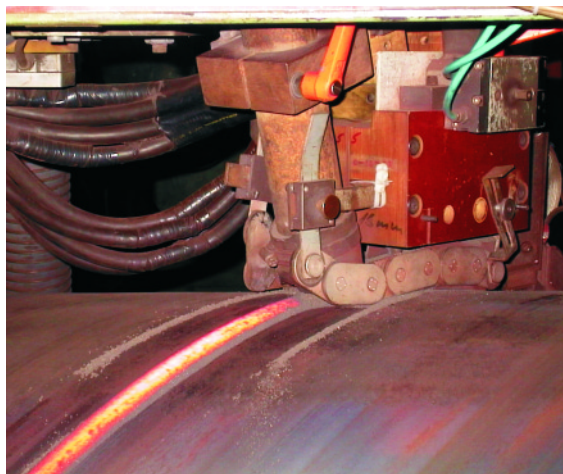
Welding head joining tubes (photo: Salzgitter AG)
